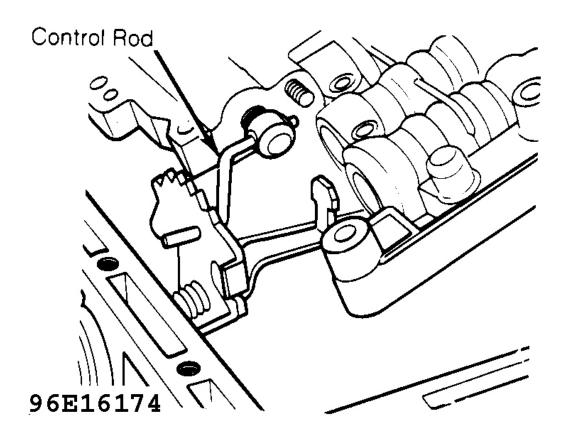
Interior View of Transmission Case Courtesy of FORD MOTOR CO.
